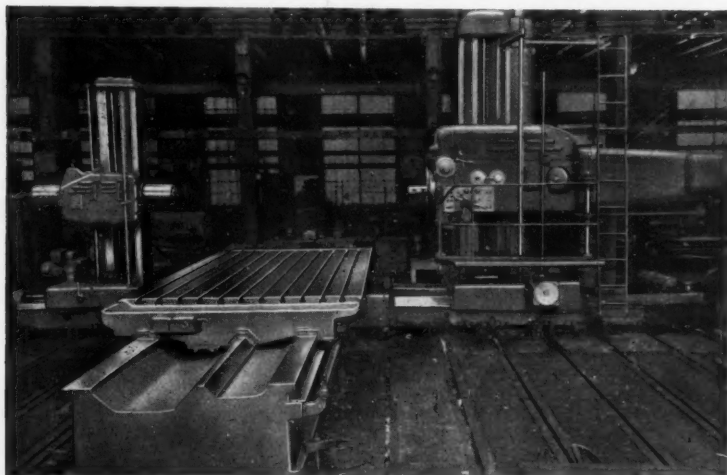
Of the Traversing-table Type, the Sverdlov LR66C Boring Machine, Here Shown, has a Spindle of Approximately 6 in. Diameter, which can be run at 1,000 r.p.m., and Incorporates an Amplidyne-drive for the Feed Motions
